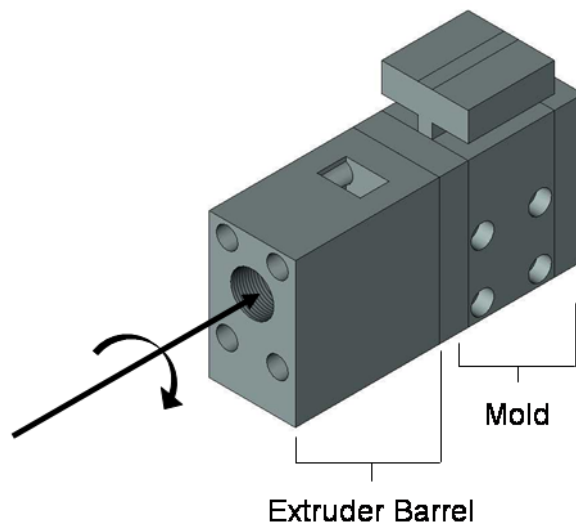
HAp/C composite extruder and mold assembly showing direction of ram travel when extruding the wet composite slurry into the mold.
